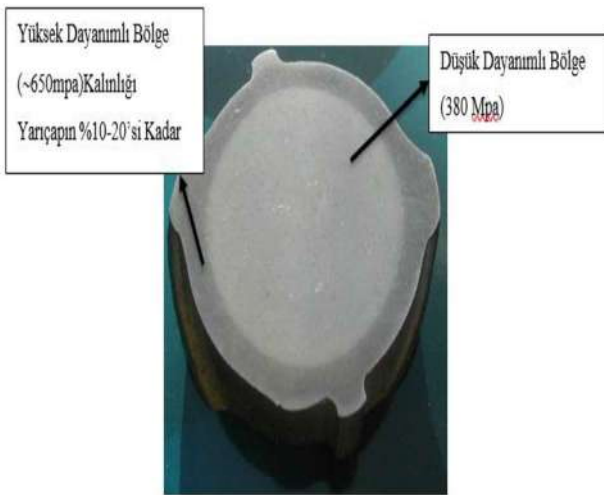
Internal Structure of Reinforced Concrete Steel Produced with Tempcore [5]
